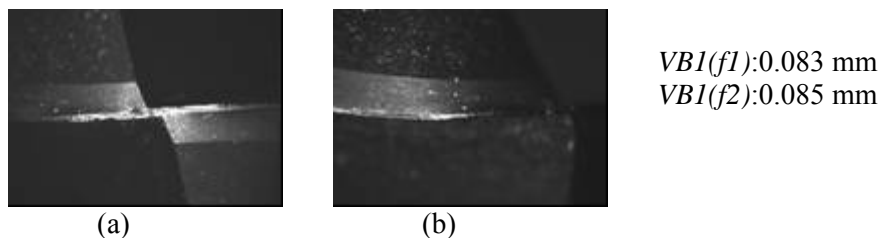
Flank wear on cutting edges of tool $T2$. Scale Photo 3.134 mm x 2.339 mm.
